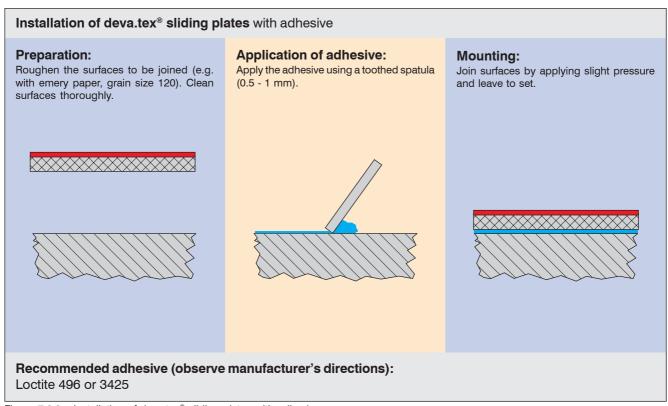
Installation of deva.tex® sliding plates with adhesive
